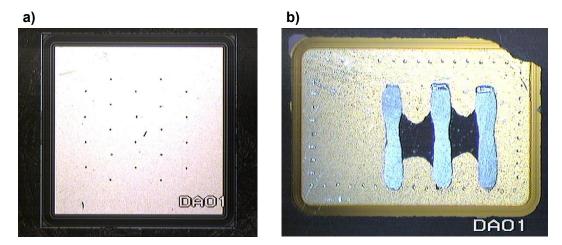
Example of Probe Marks from two different Manufacturer. From Table 3.1, Manufacturer A on the left (a) and manufacturer D on the right (b)
